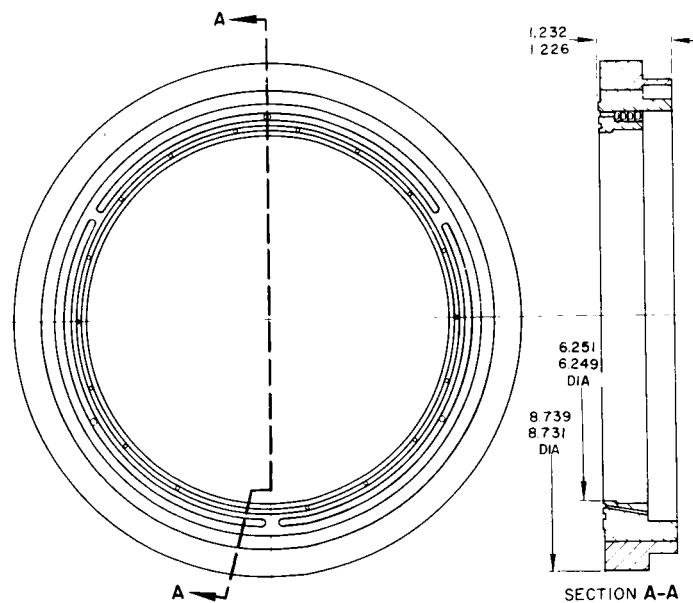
Seal Assembly for Externally Pressurized Hydrostatic Seal (Stein Seal Co. No. SSCY 2998)
